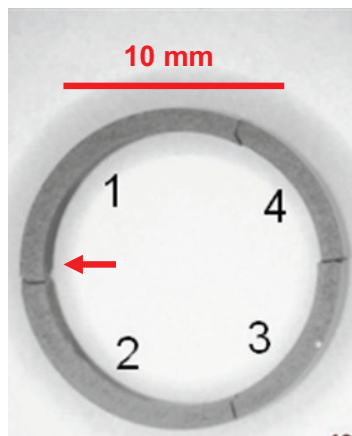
O-ring specimen fractured in bending test [120]. Red arrow indicating position in which micrograph shown in Figure 46 was taken.
